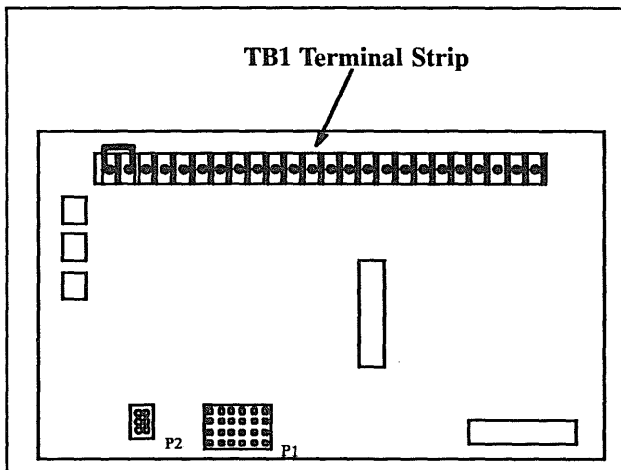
TB1 Terminal Strip on Controller circuit Board
